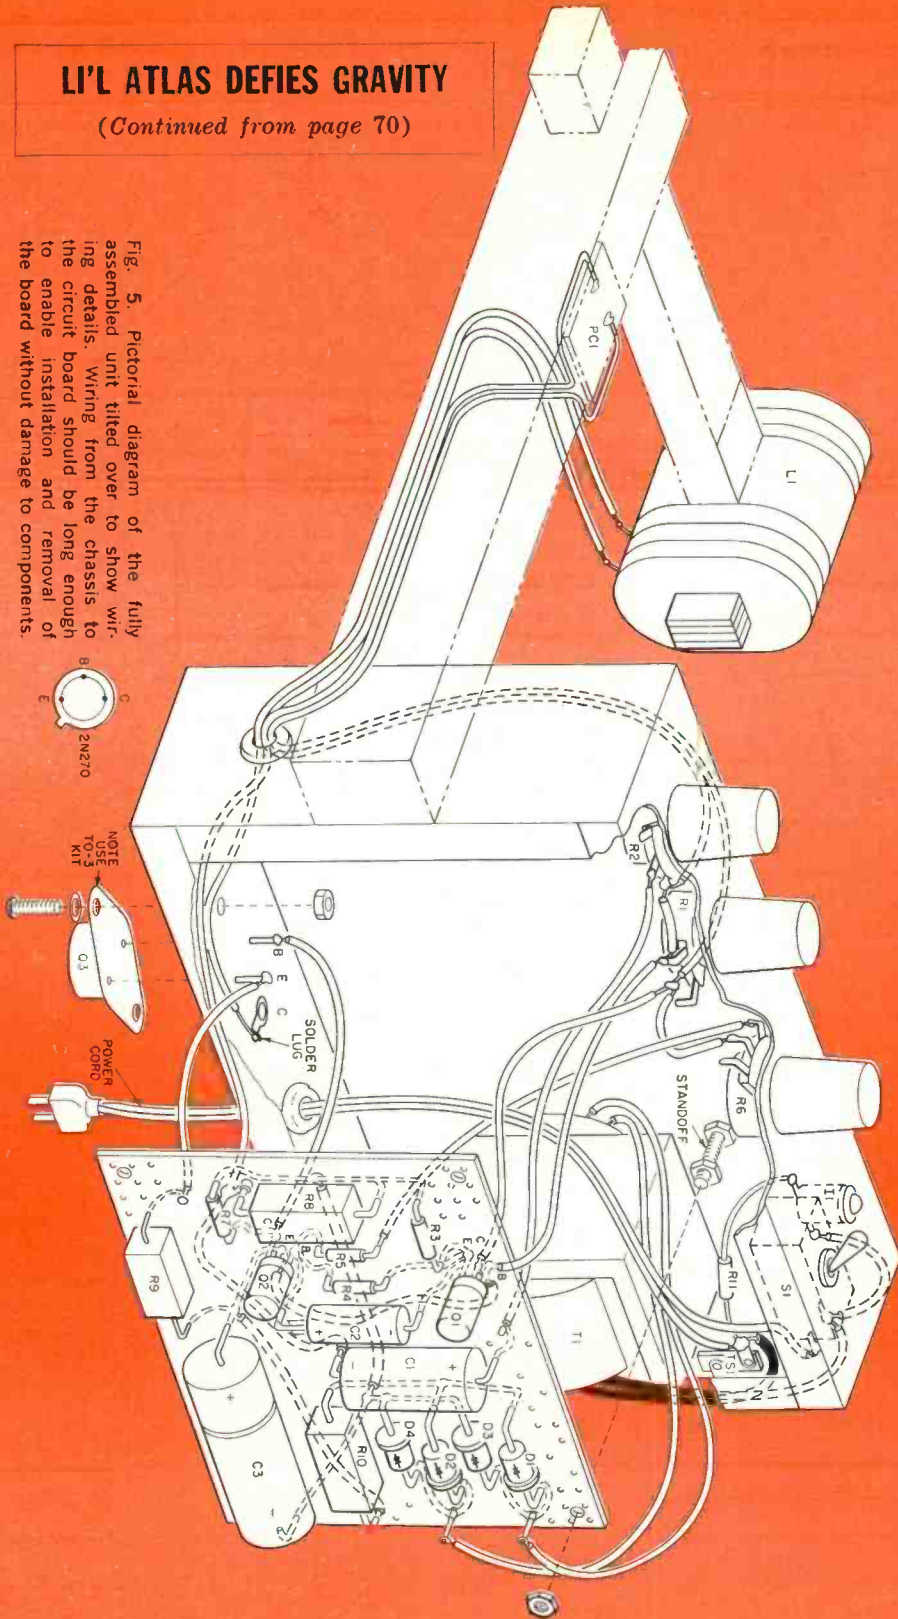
Pictorial diagram of the fully assembled unit tilted over to show wiring details. Wiring from the chassis to the circuit board should be long enough to enable installation and removal of the board without damage to components.
